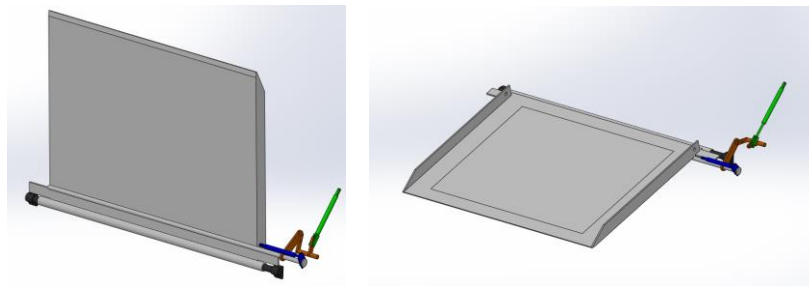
Automated ramp, closed position (Left); Opened position (Right)
